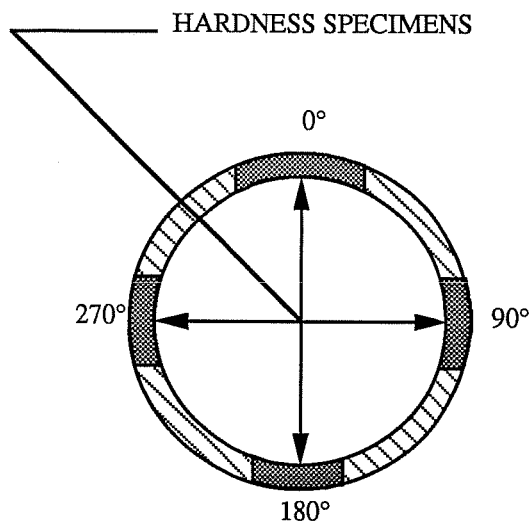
Location of hardness specimens - Welds 2.08 and 2.11.
